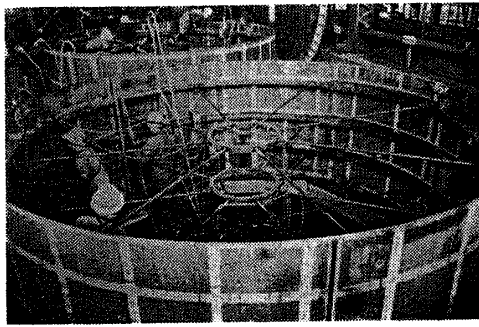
(a) Jigs for maintaining circularity of frames (The photo. shows tack welding of frames to inner hull plates).
